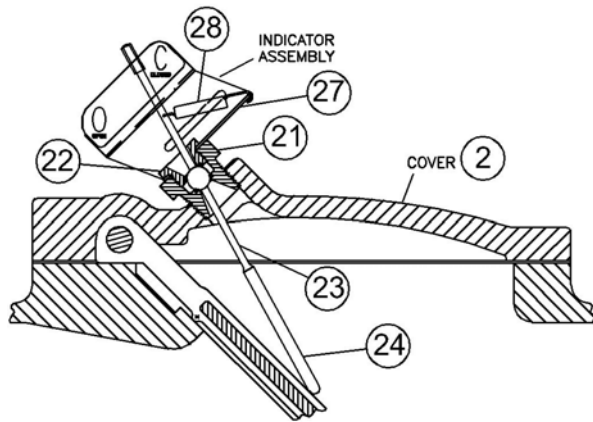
MECHANICAL INDICATOR ASSEMBLY
